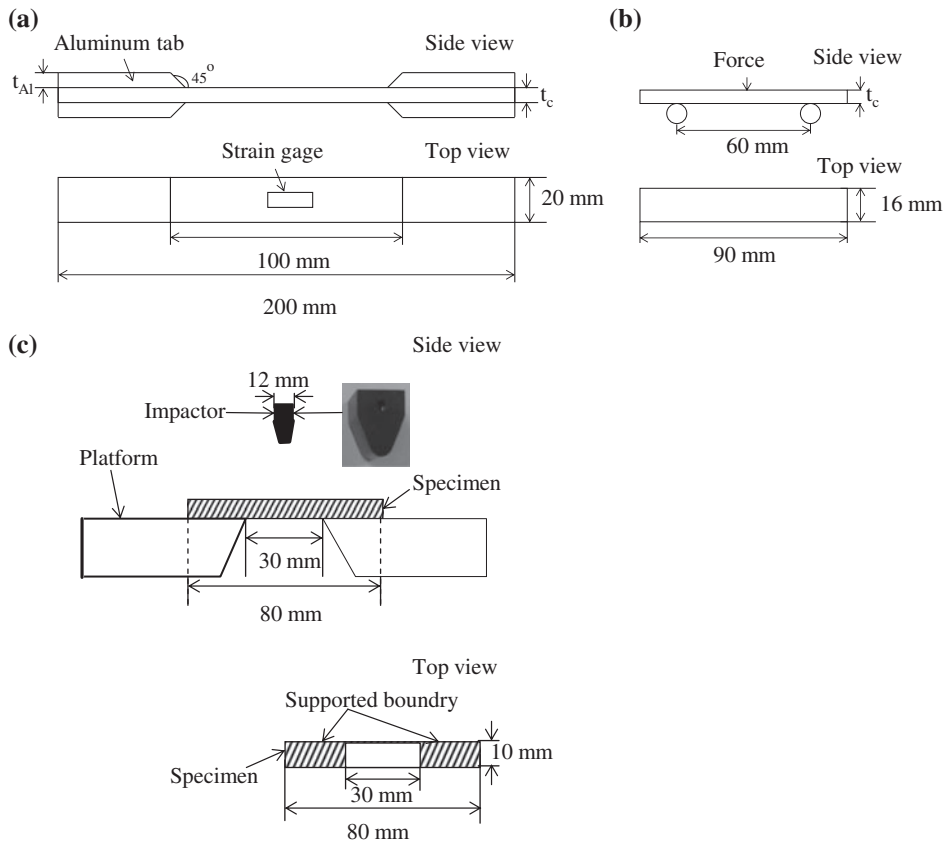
Geometry of the specimen; (a) tensile test, (b) three-point bending test and (c) three-point bending impact test.
